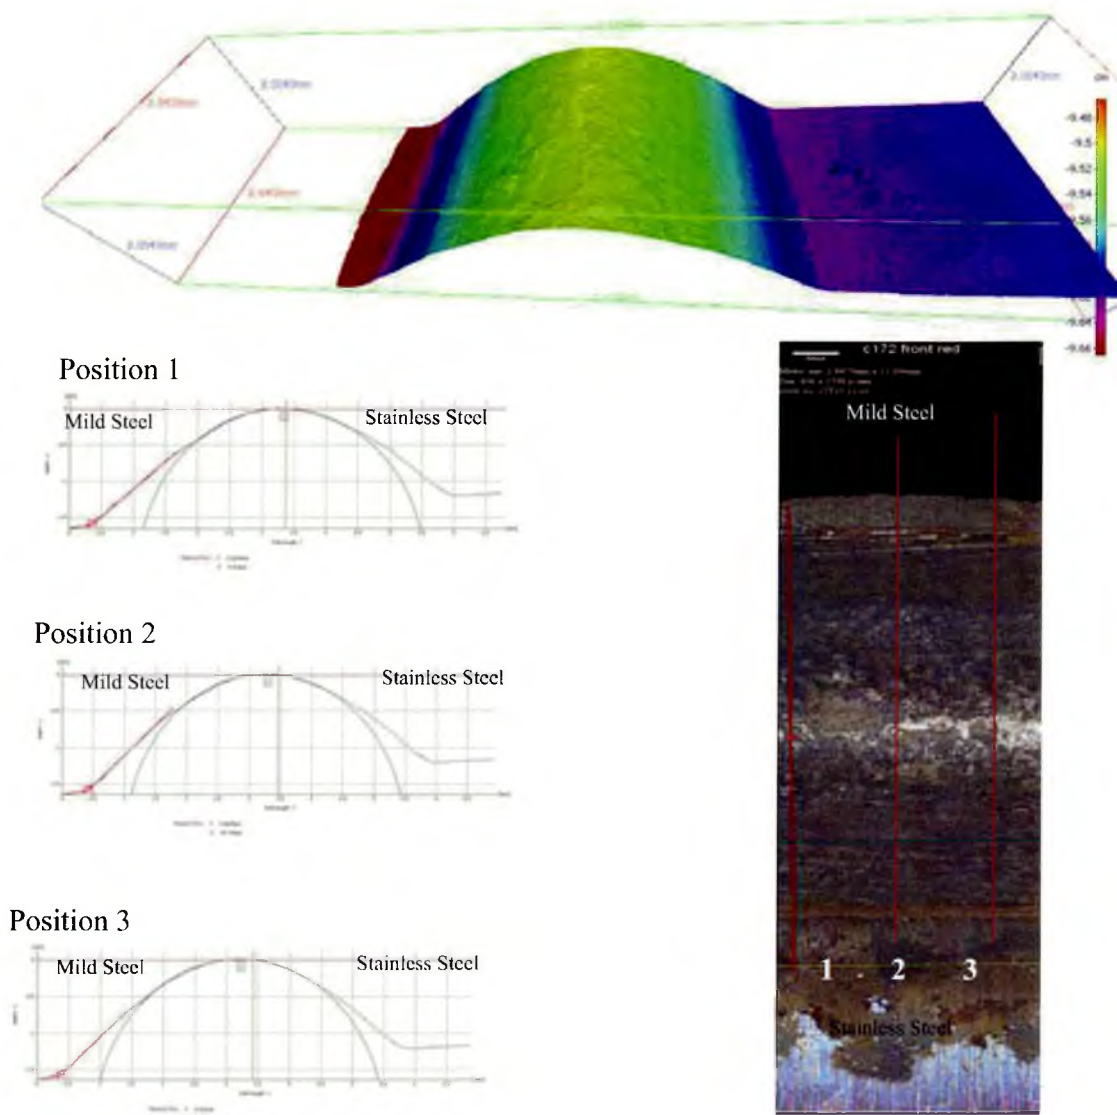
IFM 3D surface image and surface profiles for the front of the weld bead of sample C1.7.2
